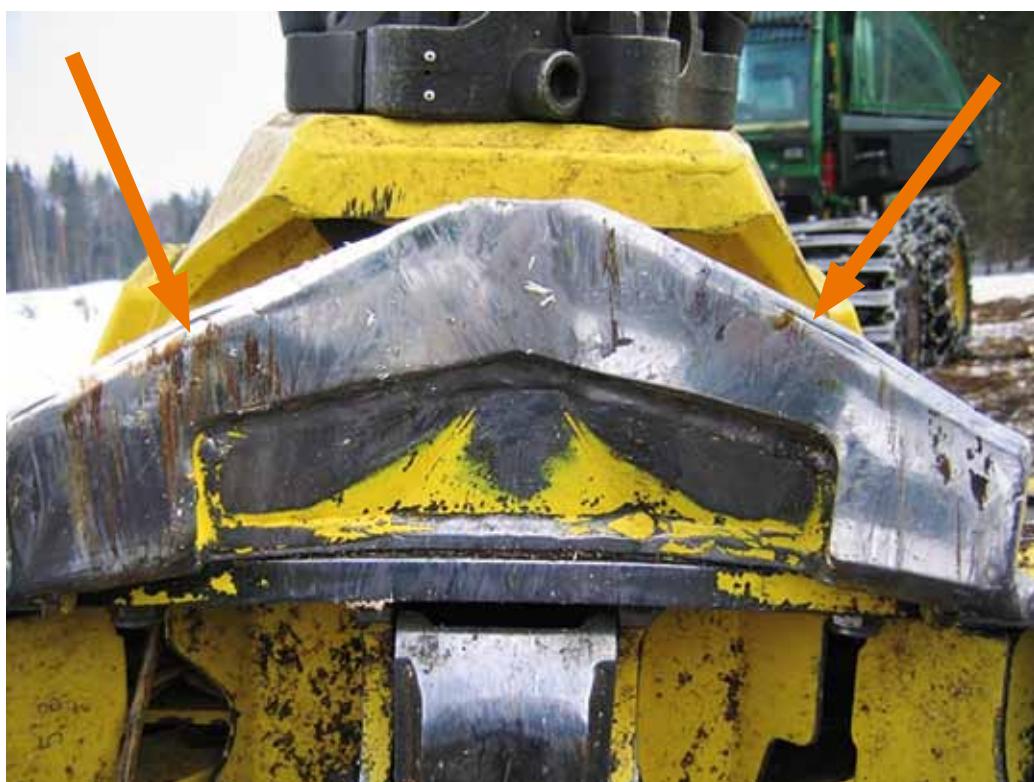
Top supporting knife with counter sharpening along the lower cutting edge
